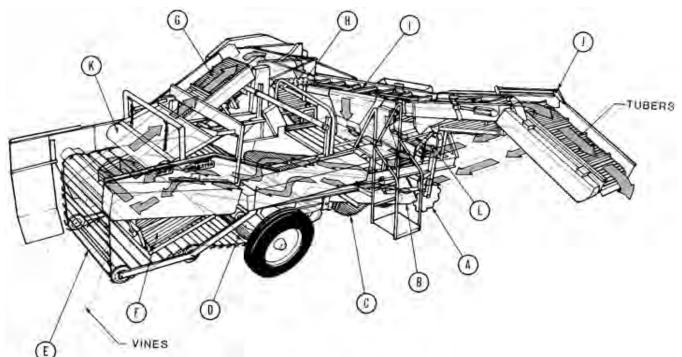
Thomas 635 Potato Harvester: (A) Coulters, (B) Spade, (C) Primary Digger Chain, (D) Secondary Digger Chain, (E) Deviner, (F) Cross Conveyor, (G) Elevating Conveyor, (H) Clod Roller Table, (I) Sorting Table, (J) Delivery Boom, (K) Stripper Roller, (L) Trash Conveyors.
